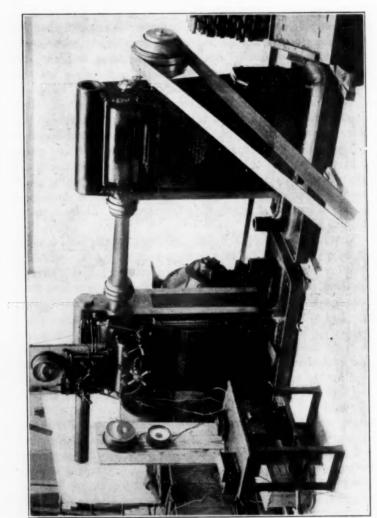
Apparatus for Testing Efficiency of Milling Machine Drives
